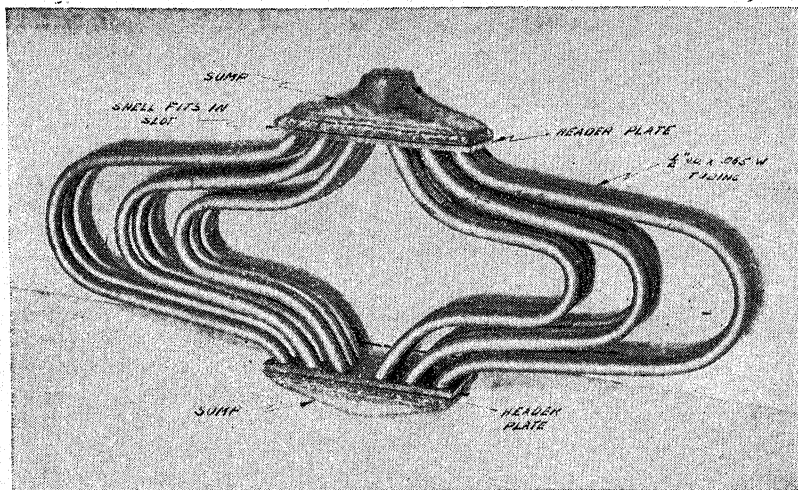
Arc welded boiler unit of airplane heater.
